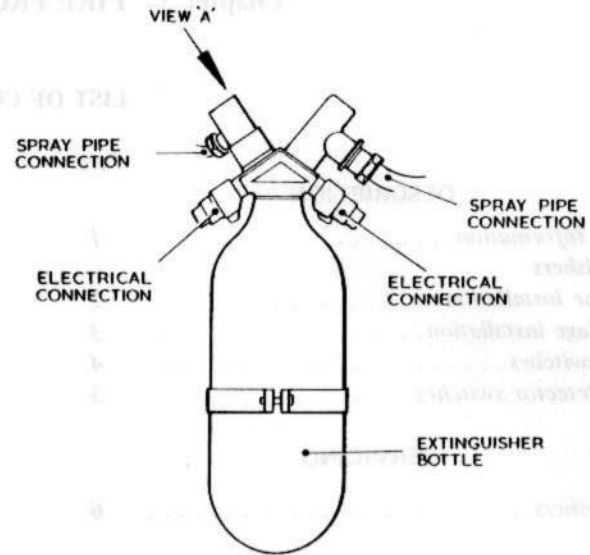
FITTING SINGLE HEAD EXTINGUISHER AND SETTING DUAL HEAD JUNCTION BOX
